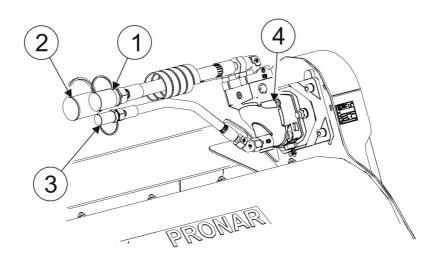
Inspecting connections of quick couplers of hydraulic motor's hydraulic conduits.
